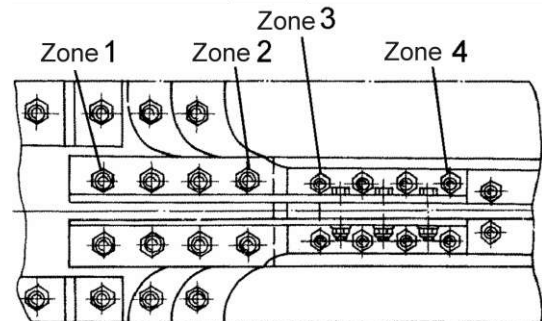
Zones of fatigue cracks initiation
